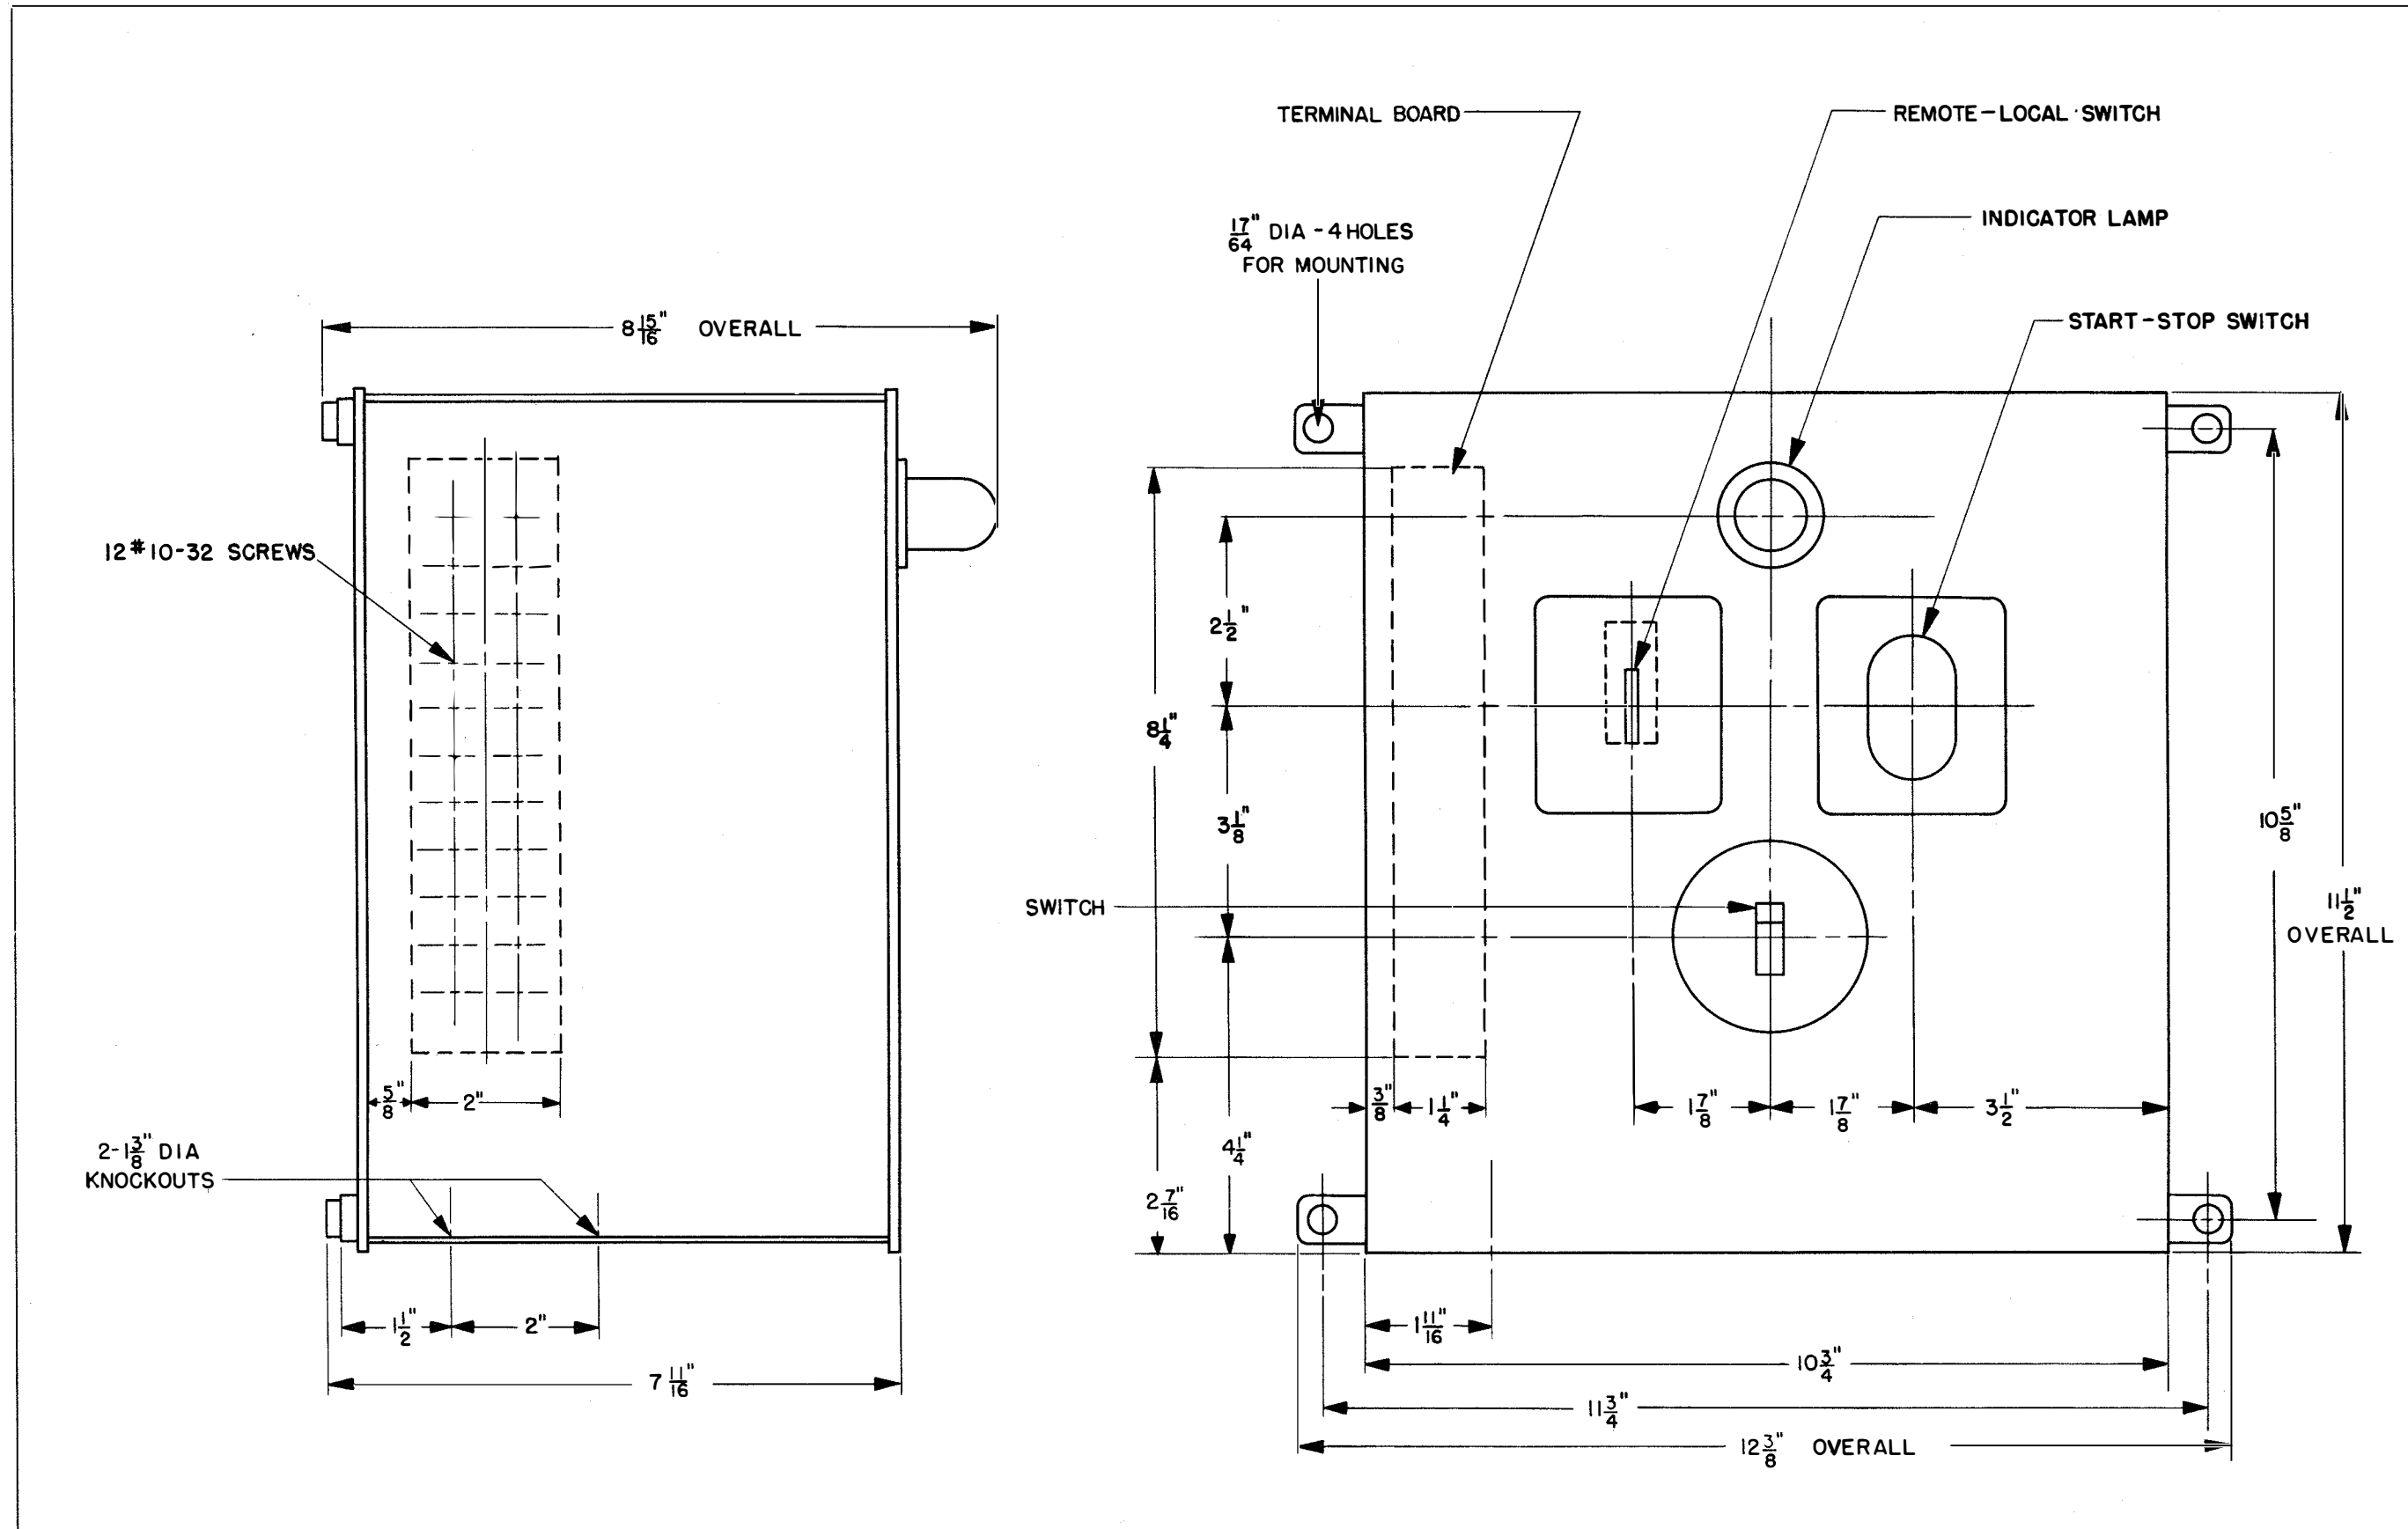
Outline Drawing, Control Unit Navy Type CG-23241
